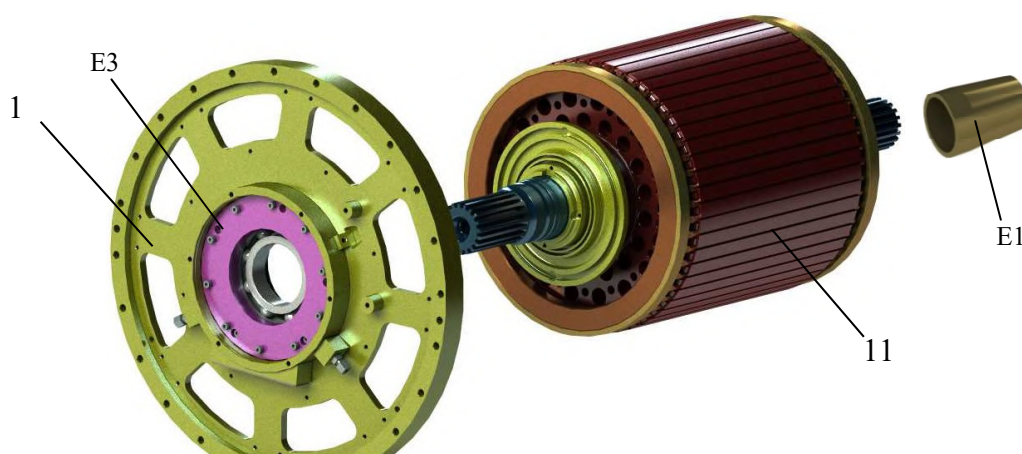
Installation of Drive Side Bearing Shield on the Rotor
